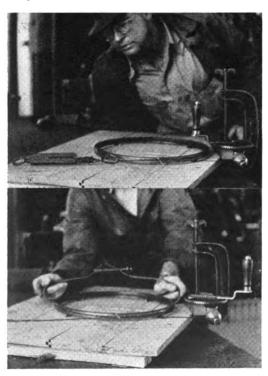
(Above)—Using a breast drill to compress a large gas engine piston ring so that the tension could be gaged. Fig. 2 (Below)—To cut down the flutter of ring ends in service, the diameter of the ring, closed to provide a gap of the correct width, must be less than that through the properly closed gap. This "plus circularity" varies with the diameter and thickness of the ring.
